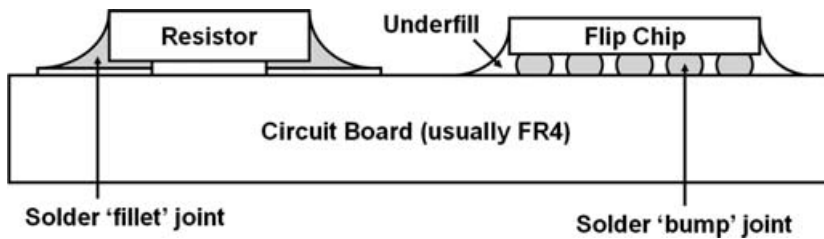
Solder joints in surface mount resistor and flip chip packages.
